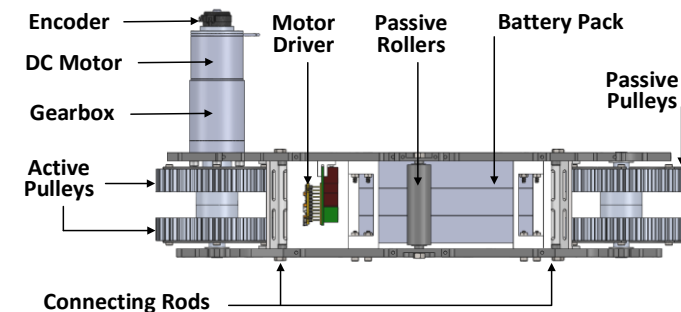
Top view of the TU showing the pulleys, the motor/gear-stage assembly and pertinent electrical layout.
